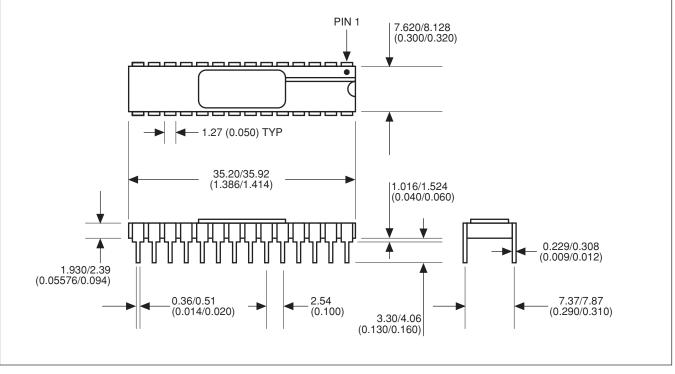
, 28-lead sidebrazed ceramic DIL (0.3in) DCB
